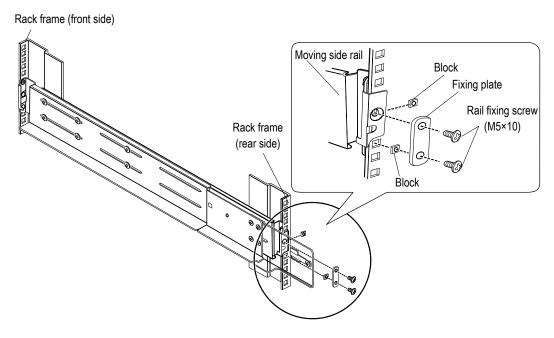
Removing Drive Box (2U) Installation Rails (for Square Hole) - 1
